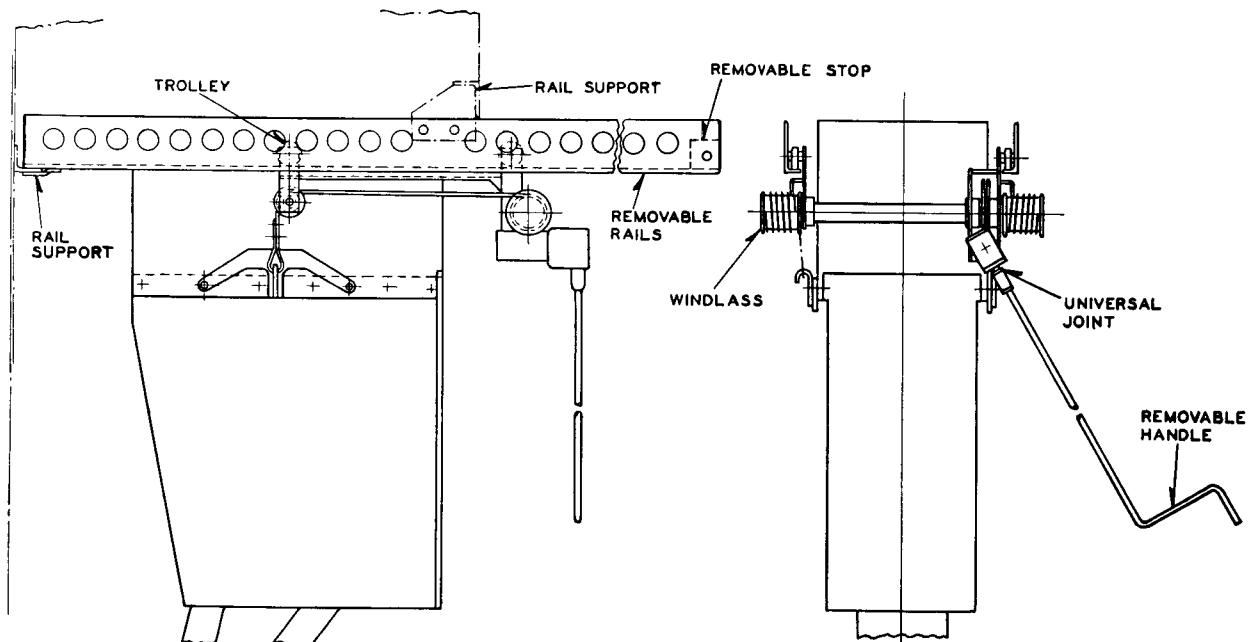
LIFTING DEVICE FOR ARC CHUTE
